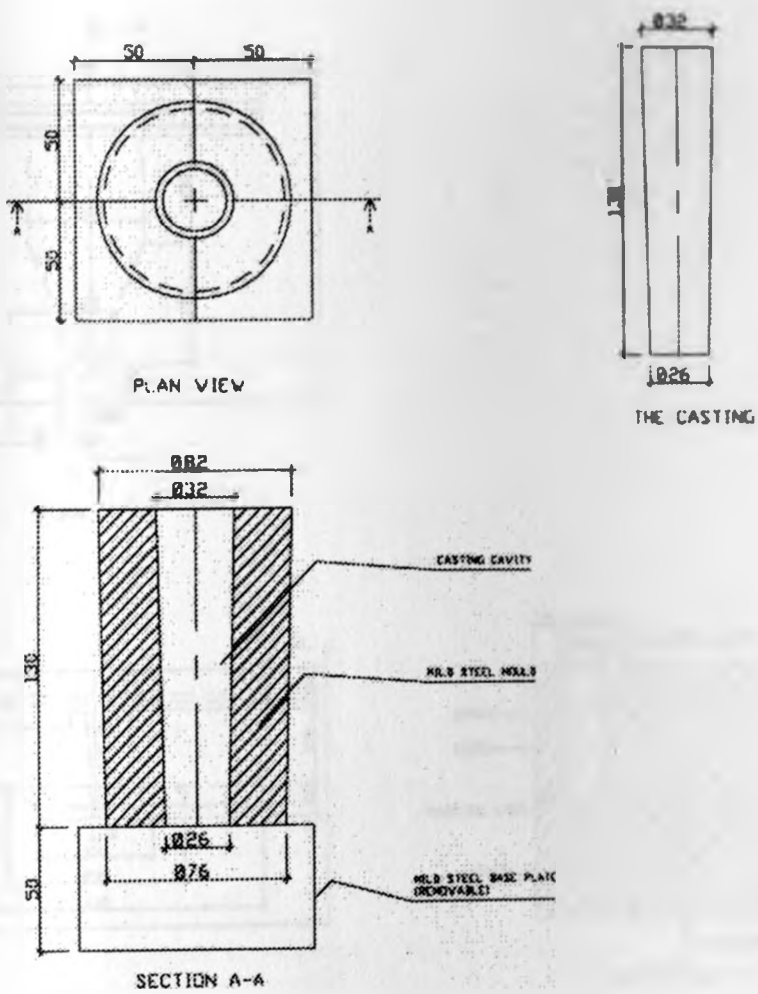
Turbulent top filled mould design assembly used in the current study for permanent mould casting. Other moulds used had similar mould dimensions and assembly except the mould thickness, which varied from 15, 20, 30, and 35mm. All dimensions are in mm
